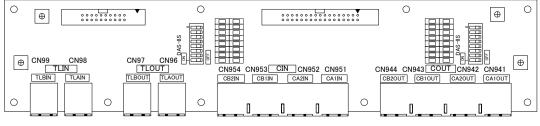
Parallel I/F PCB IFAU-09 (300-750kVA)
